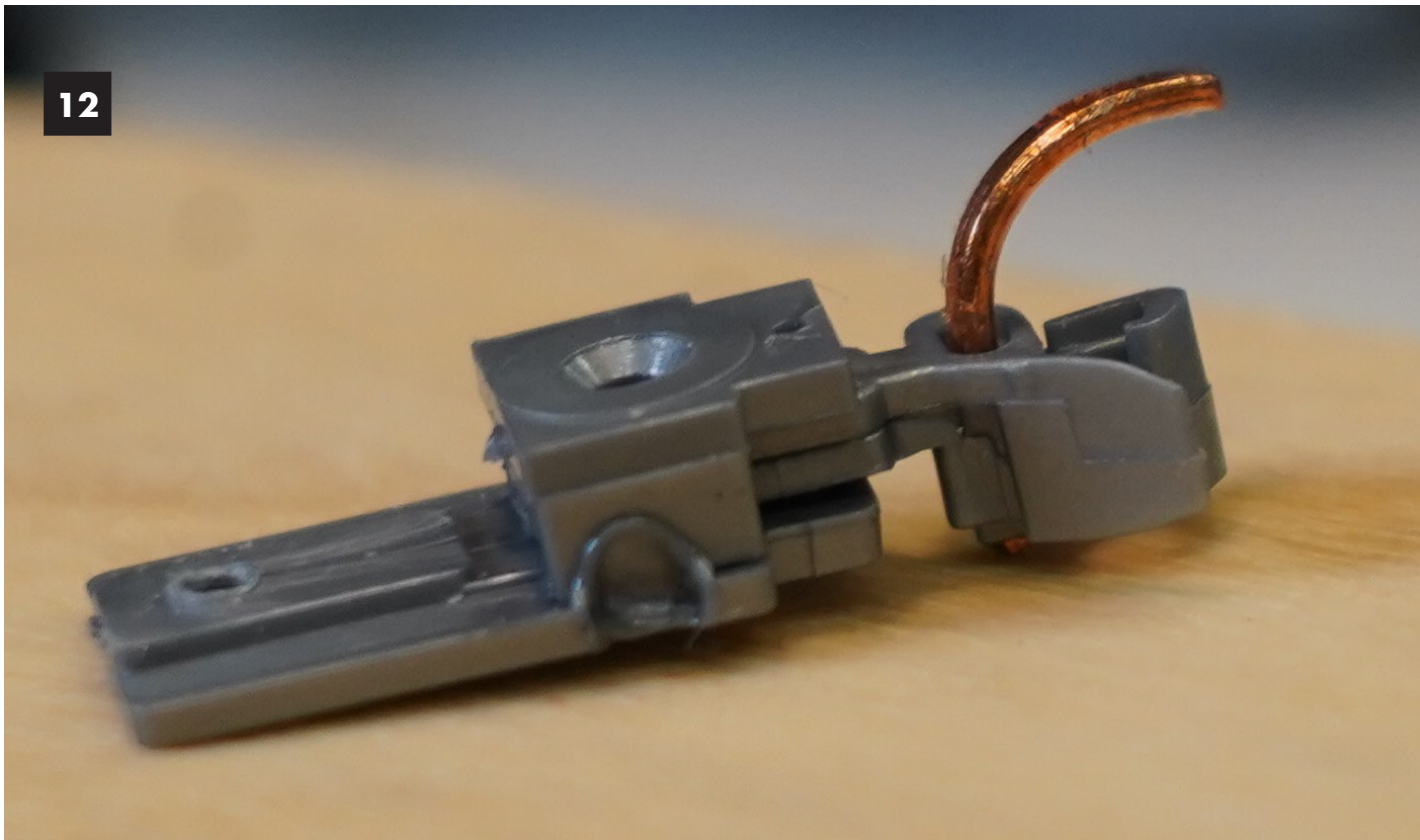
The internal parts of the coupler sometimes protrude out of the coupler pocket. If the burrs contact the truck frame and the coupler may not operate as expected. These burrs can be removed with a sharp X-Acto knife.
